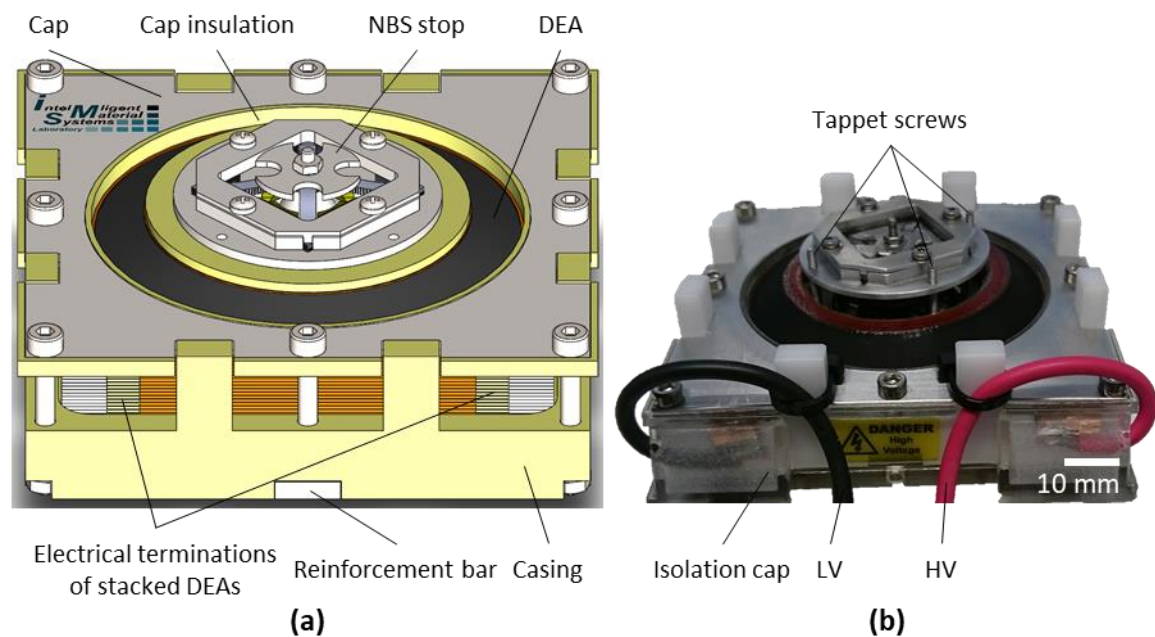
(a) CAD drawing and (b) photograph of the assembled actuator system with an overall size of  $86 \times 86 \times 25 \text{ mm}^3$ .
